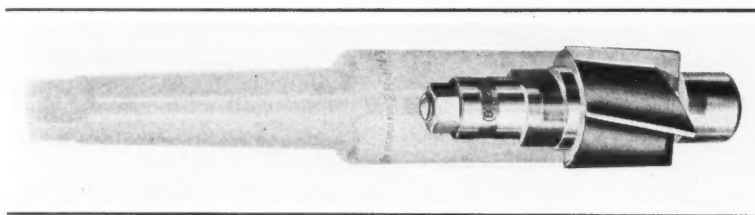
Eclipse Counterbore with Two Radial Driving Faces
